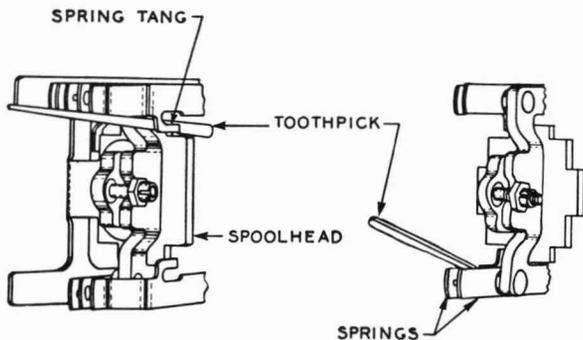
Blocking Contacts of E- and Similar-type Relays
